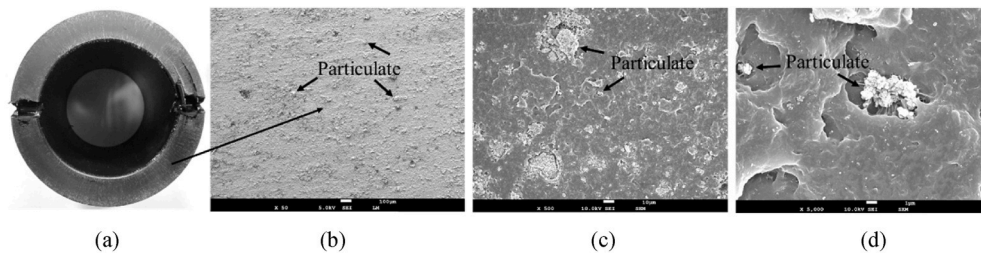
Fracture surface of HAT tested FPC joint. (a) Pipe cross-section, (b) x50, (c) x500 and (d) x5000.
